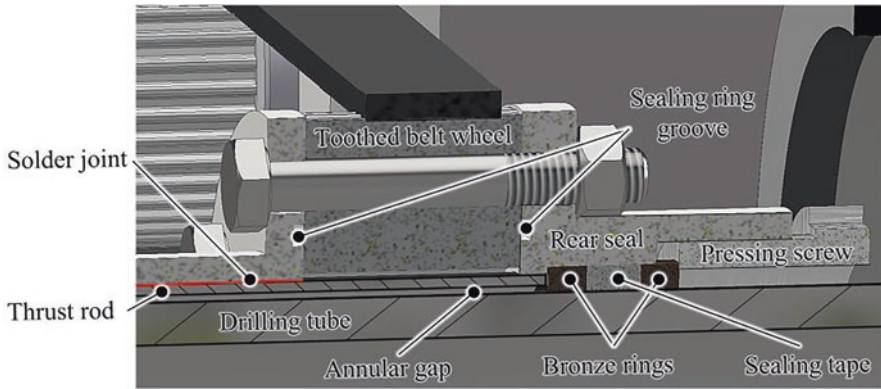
Sectional view of the thrust rod bearing and the sealing system
